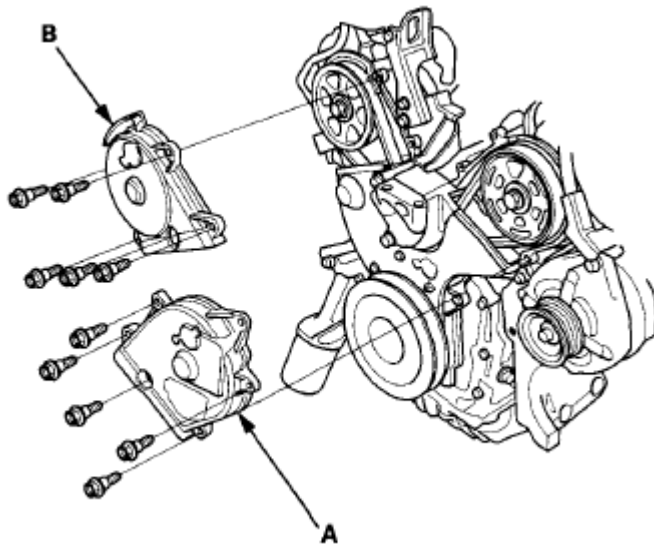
Removing Front Upper Cover And Rear Upper Cover
